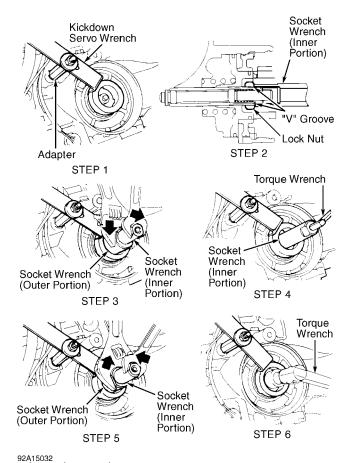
Adjusting Kickdown Servo Courtesy of Mitsubishi Motor Sales of America.
